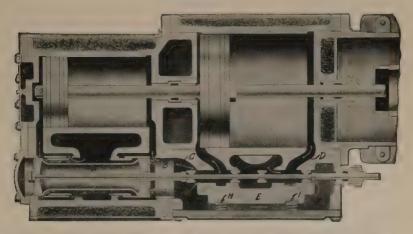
Obtaining Perfect Balance by Use of Double-Ported Piston Valve and Double-Ported Slide Valve in Compound Engine
